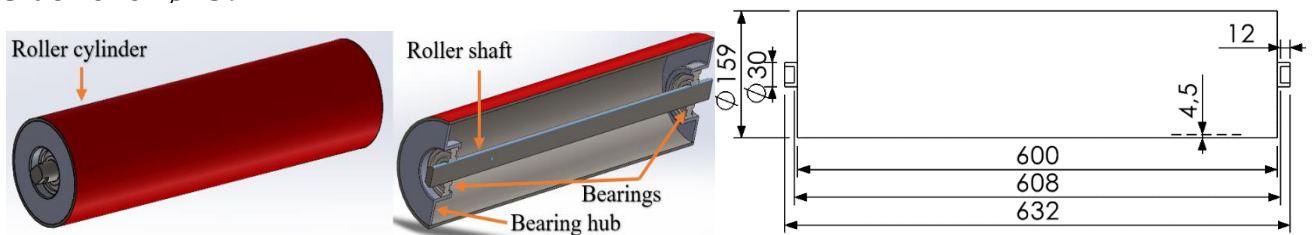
3D model of existing side roller with section view and 2D drawing[14]
